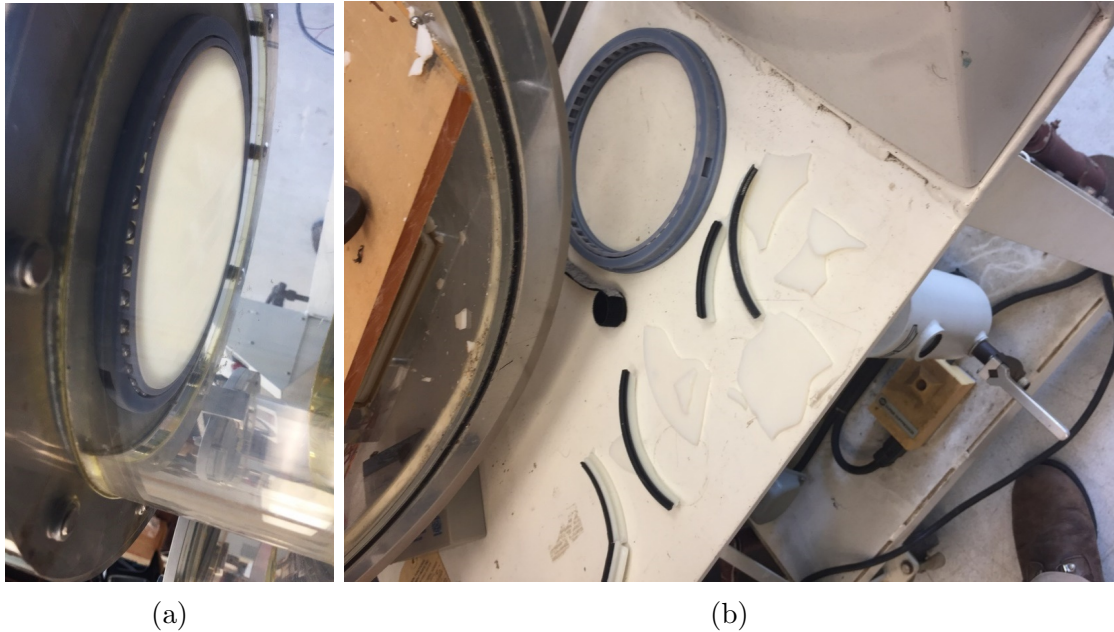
Bearing race began to separate at an angle (left) causing bending forces to act on the inner race. This caused the inner race to fail by breaking in the glovebox (right).
